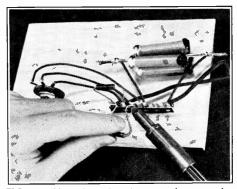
This illustration shows you how to make a temporary soldered lap joint for the purpose of connecting a radio part temporarily between two terminals. This technique allows you to hold the part with one hand (instead of holding the solder in that hand), and gives a joint which can easily be disconnected.
